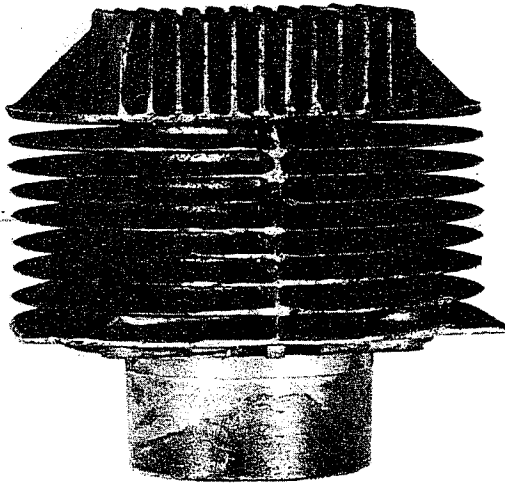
A one-piece cylinder and cylinder head is common in two-stroke engines.
